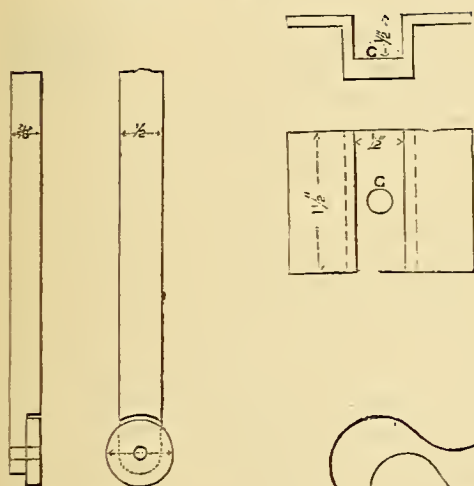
DETAIL OF ROLLER AND SHAFT.
